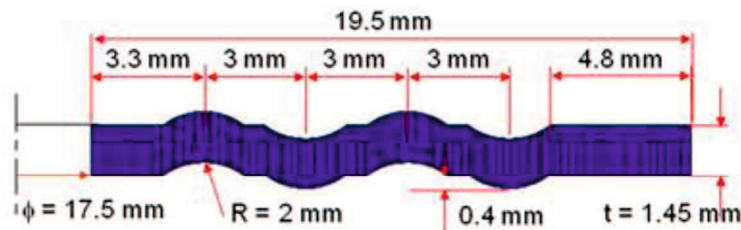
Basic dimensions of the gasket (Adapted from [14])
